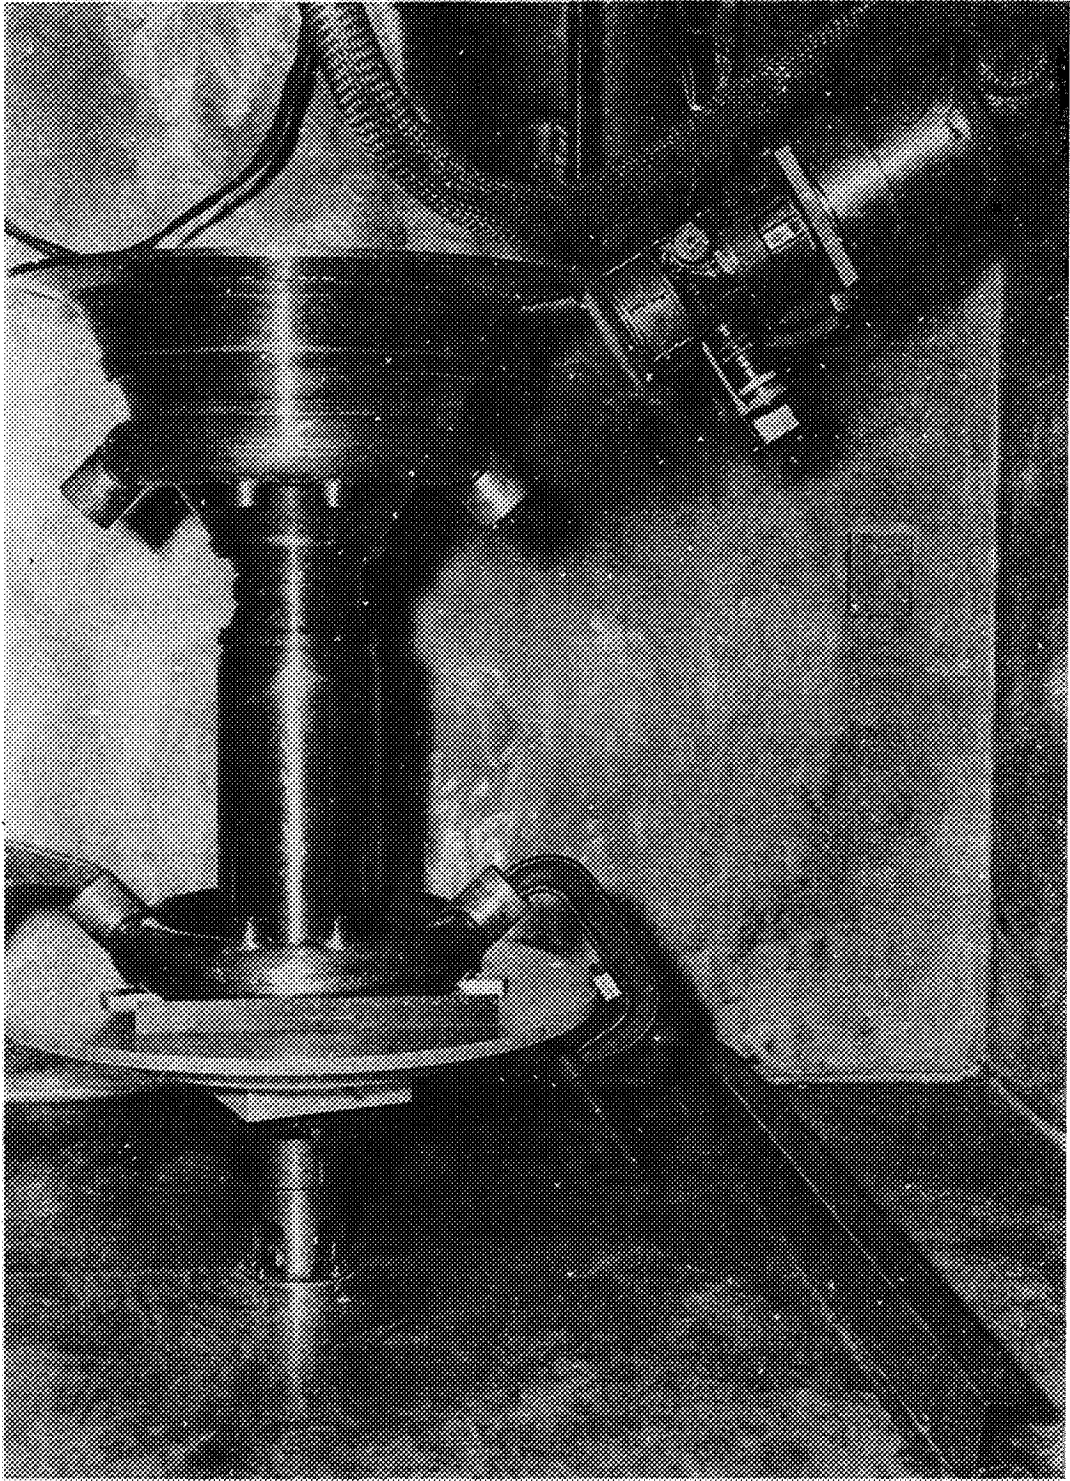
Electron Beam Welding Chamber, Inlet Manifold Aft Joint
